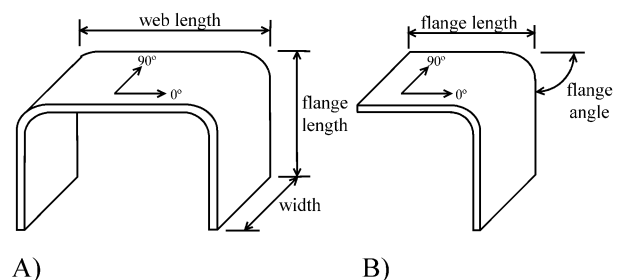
Part geometries: (a) C-shaped part, (b) L-shaped part.
